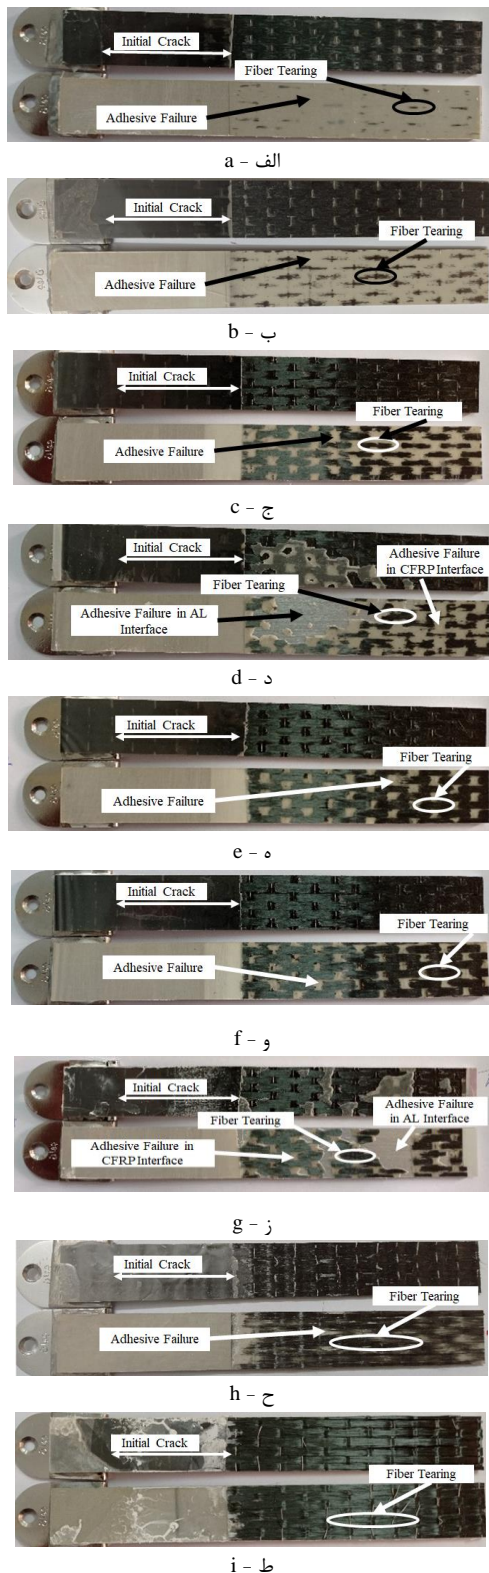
Fracture surface with different surface treatment approaches a) specimen LA1, b) specimen LA2, c) specimen LA3, d) specimen LA4, e) specimen LA5, f) specimen LA6, g) specimen LA7, h) specimen S, i) specimen PP
